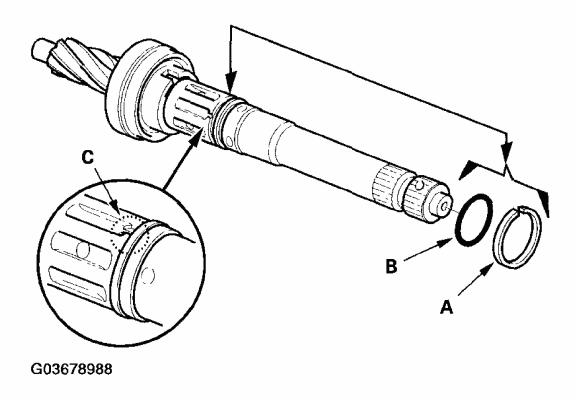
Removing Valve Seal And O-Ring Courtesy of AMERICAN HONDA MOTOR CO., INC.
